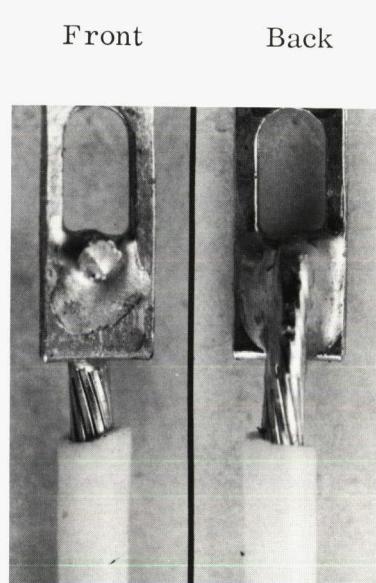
Soldered Connection Inspection Criteria
